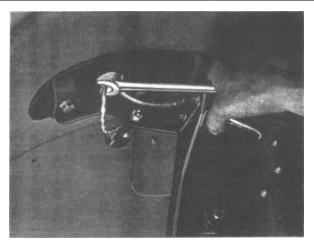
J-868 Headlamp Adjusting Nut Wrench
